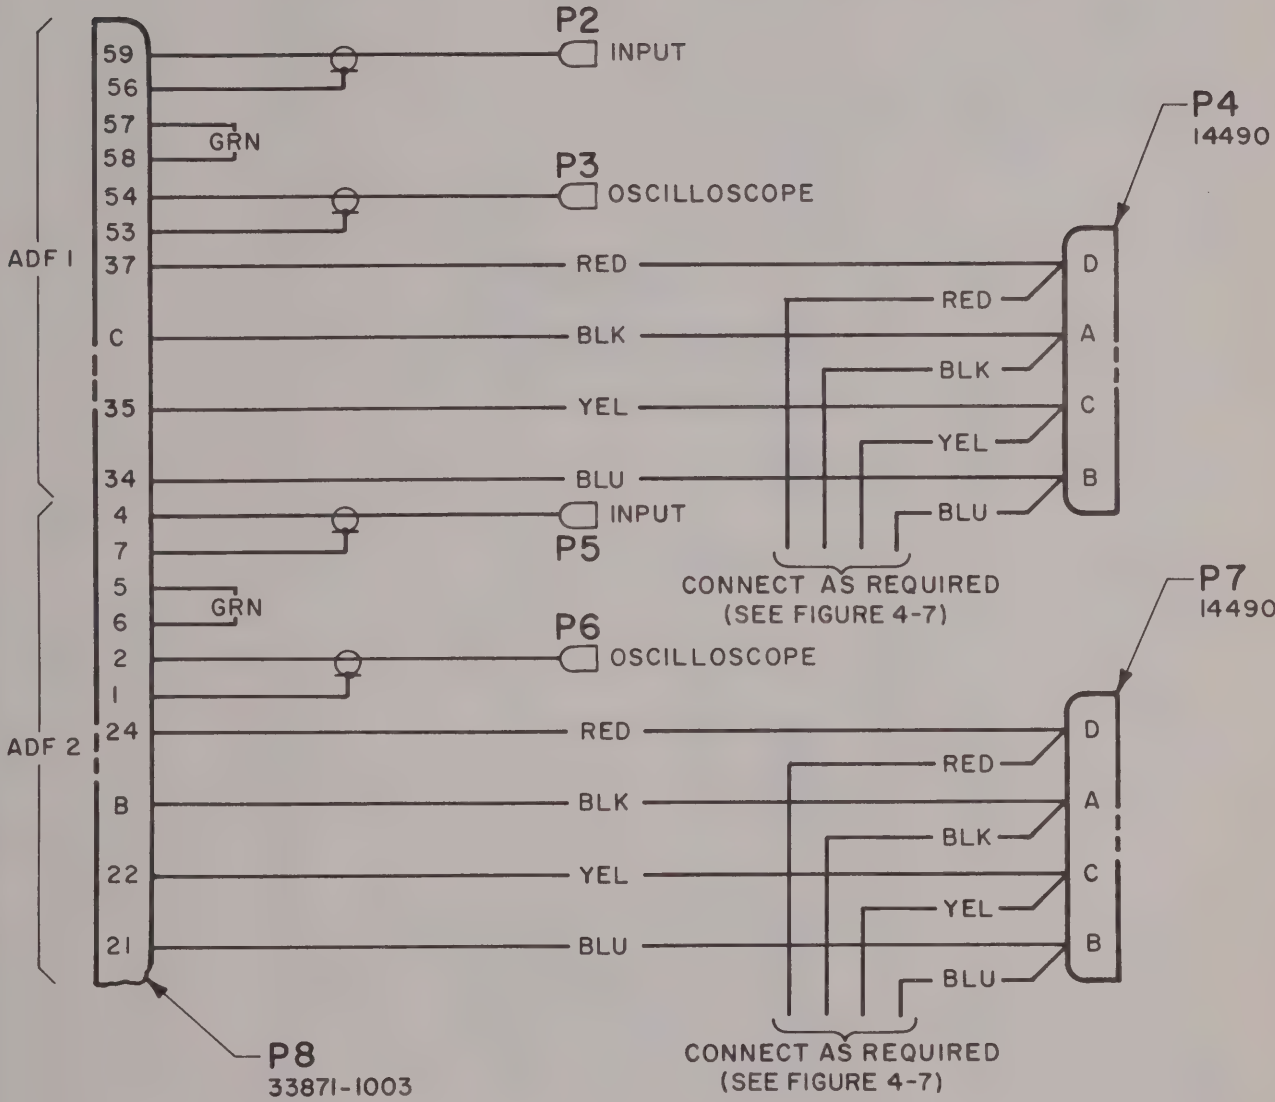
Cable Assembly for Bench Testing RA-346A or RA-346B Receiver Accessory, Wiring Diagram
